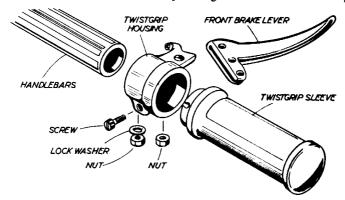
THROTTLE TWISTGRIP ASSEMBLY ON N AND S MODELS
